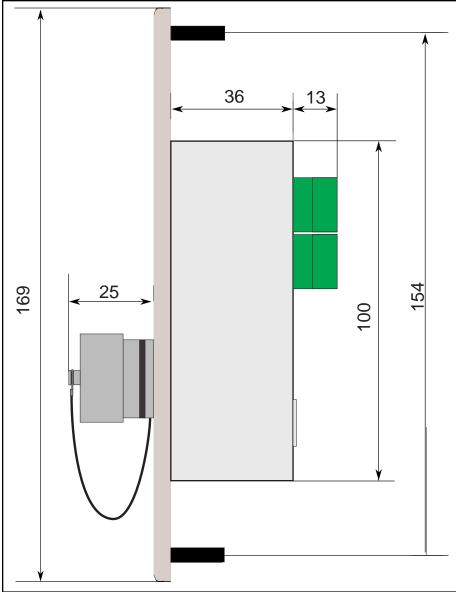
Mounting depths: IndraControl VAC 30.2
